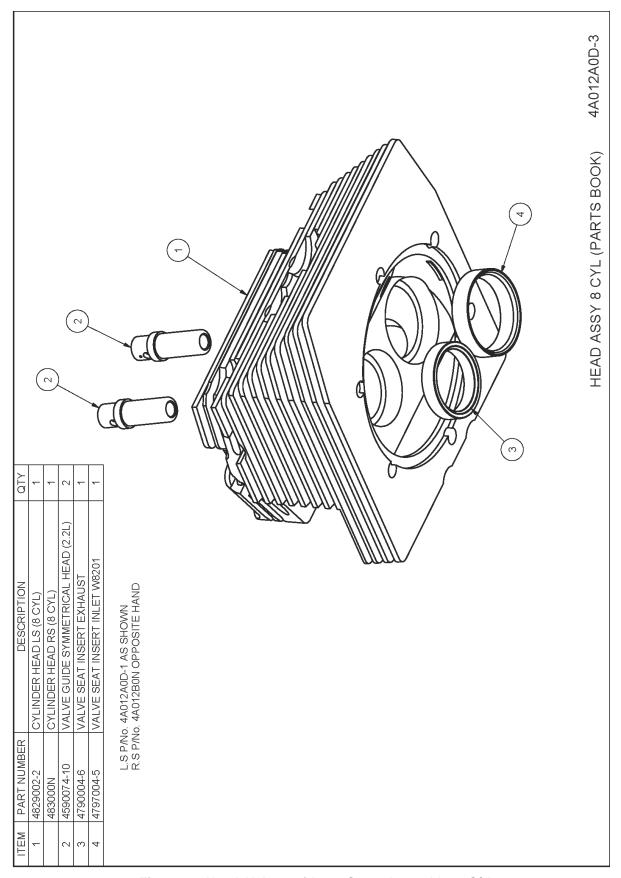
Head, Valve Guides & Seats Assembly to S/N 33
